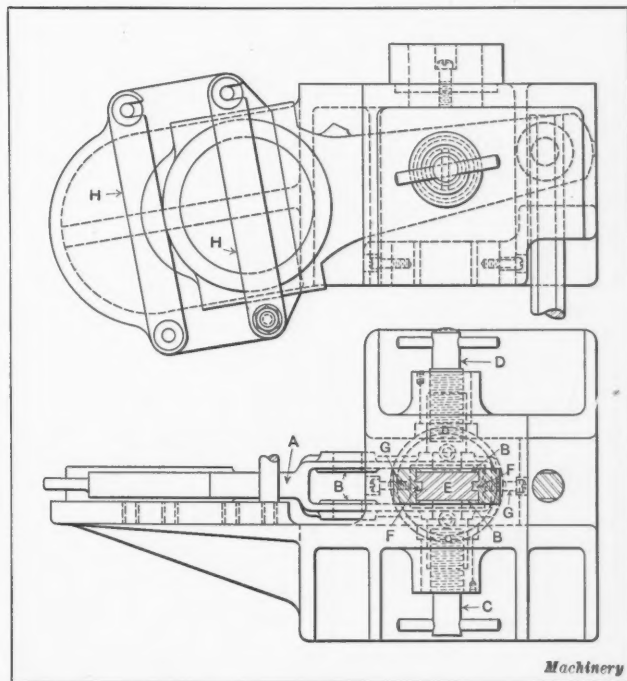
Finishing the Inside Surfaces of Bosses *B* on the Broaching Machine
